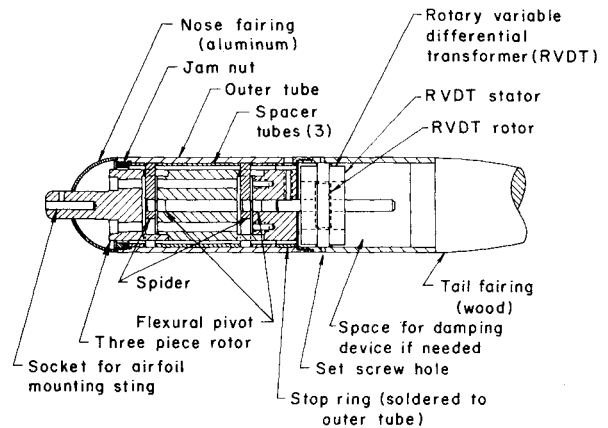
Longitudinal cross section of torque meter. All parts are stainless steel unless noted.
